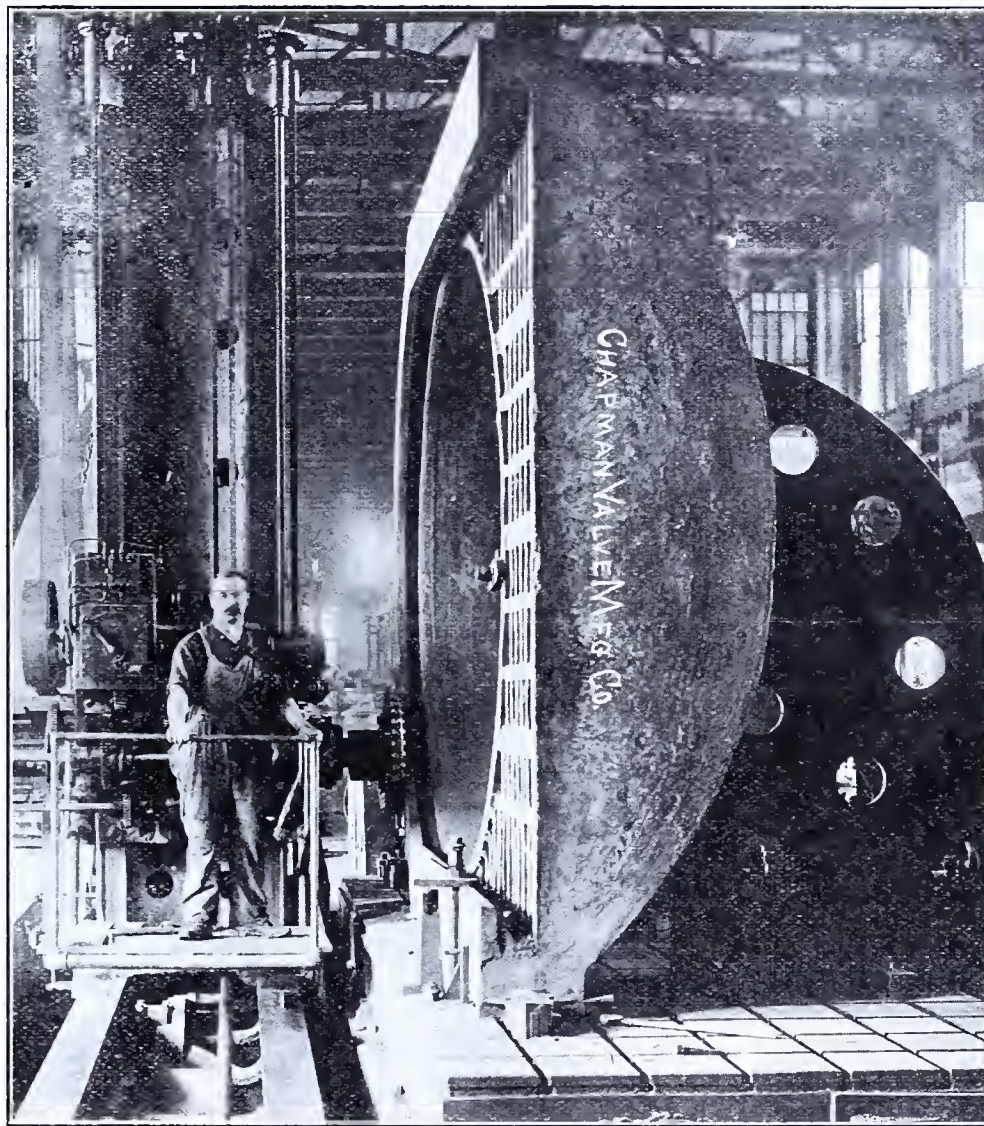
LARGEST HYDRAULIC VALVE IN WORLD.
